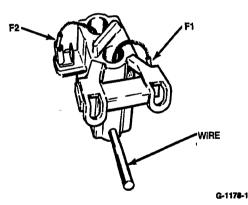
BRUSH HOLDER ASSEMBLY
